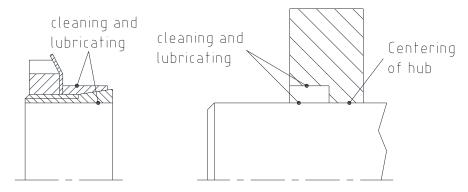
Cleaning and lubricating the surfaces (example: CLAMPEX® KTR 125)
